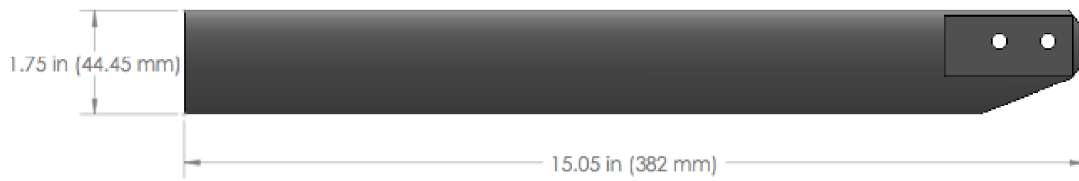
Rectangular rotor blade with representative chord and radius dimensions.
